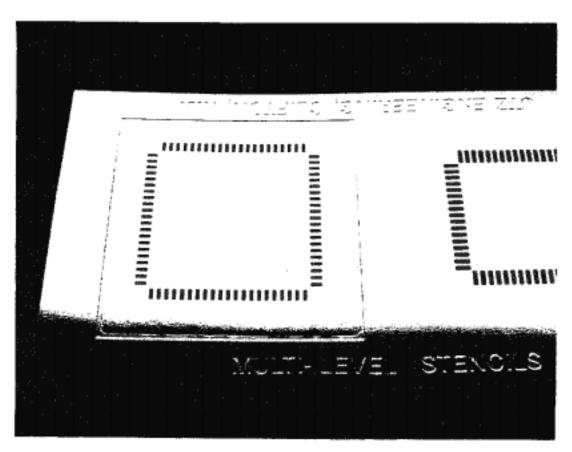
Multilevel or selective etching in a metal mask stencil for depositing different solder paste thicknesses on the same board. (Photograph courtesy of Intel Corporation.)
